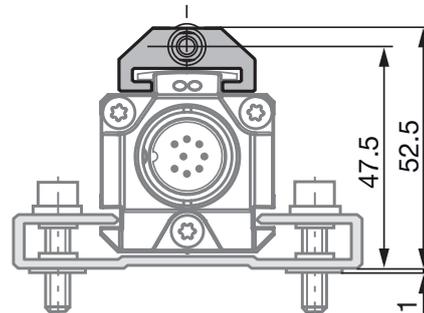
Dimensions and distances with BTL5-T-2814-1S magnet
